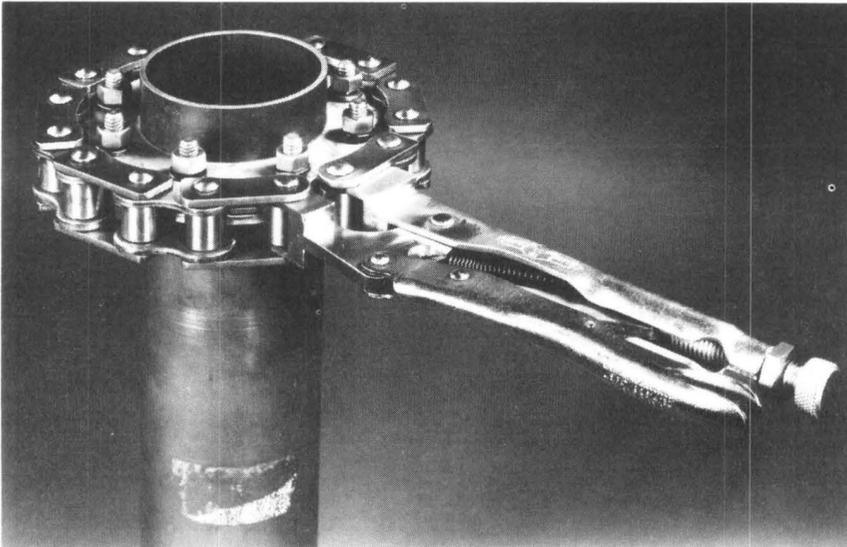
A special wrench designed to align round waveguide runs on microwave radio-relay towers. It consisted of a gripping wrench with a length of stainless-steel roller bearing chain, which held the two mating flanges precisely in position while the bolts were being tightened.
